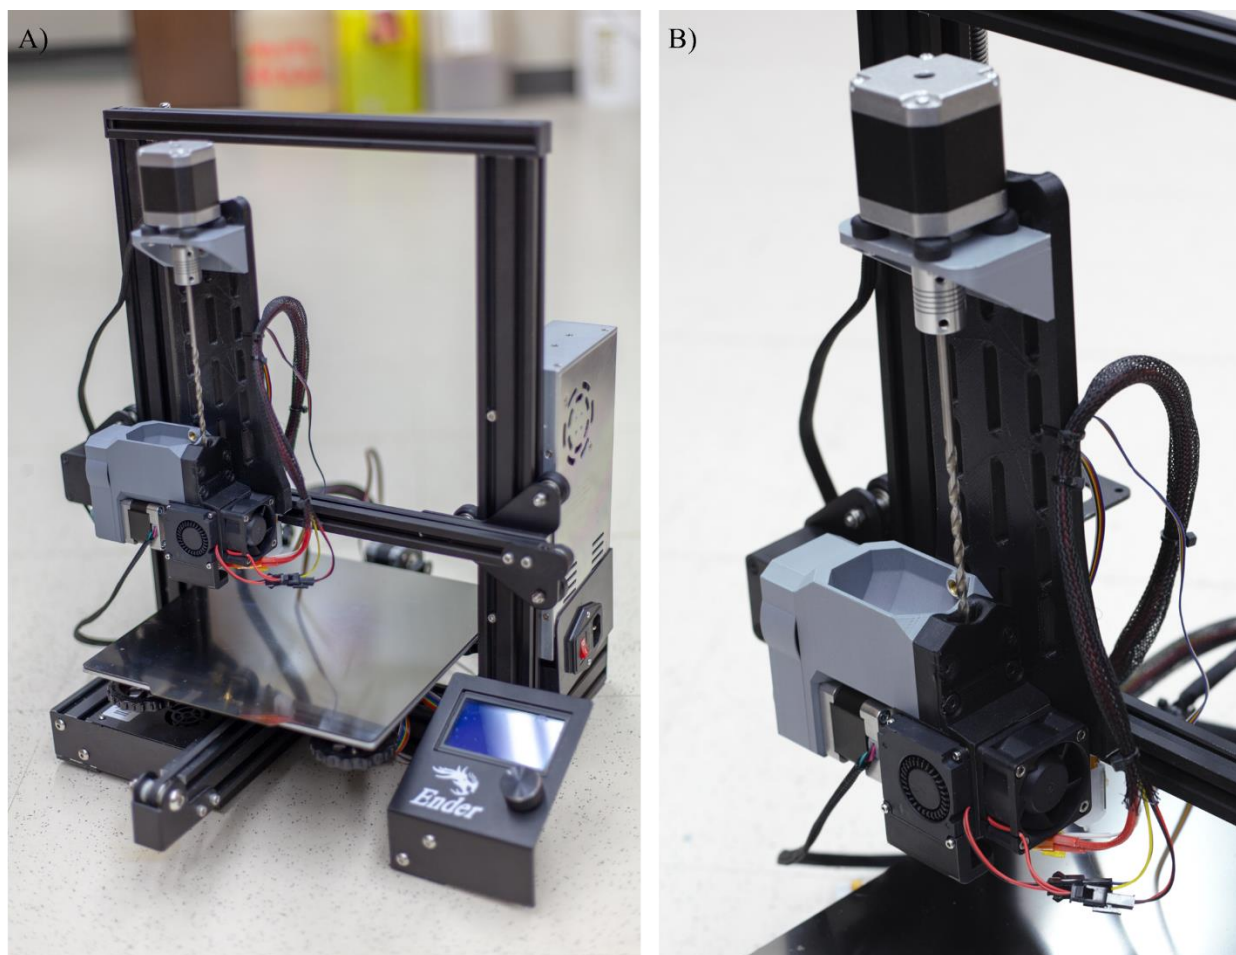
Additional images of the modified Ender 3 printer and the custom designed PME print head. A) Image of the entire printer. B) Image of custom print head attached to printer.
